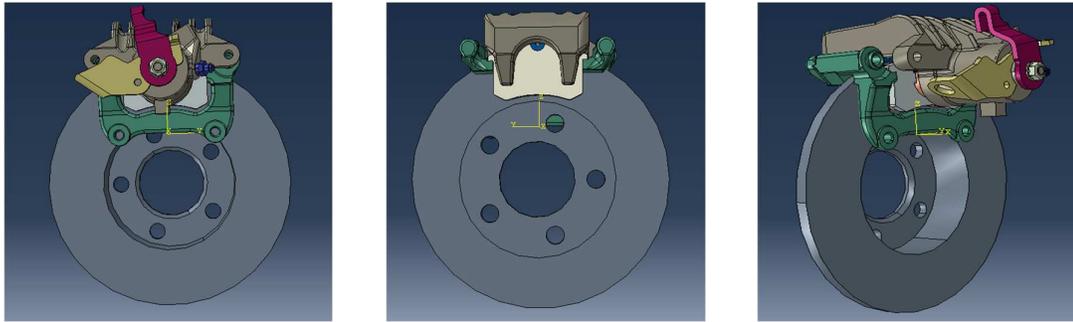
Brake disc - caliper assembly, configuration and structural geometry
